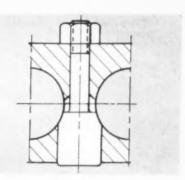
Multiple clamping may be accomplished with bolt style of clamp shown.
